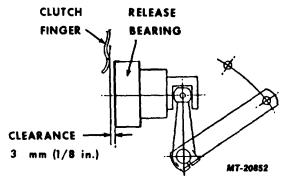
Release Bearing Clearance (Push Type Clutches)
